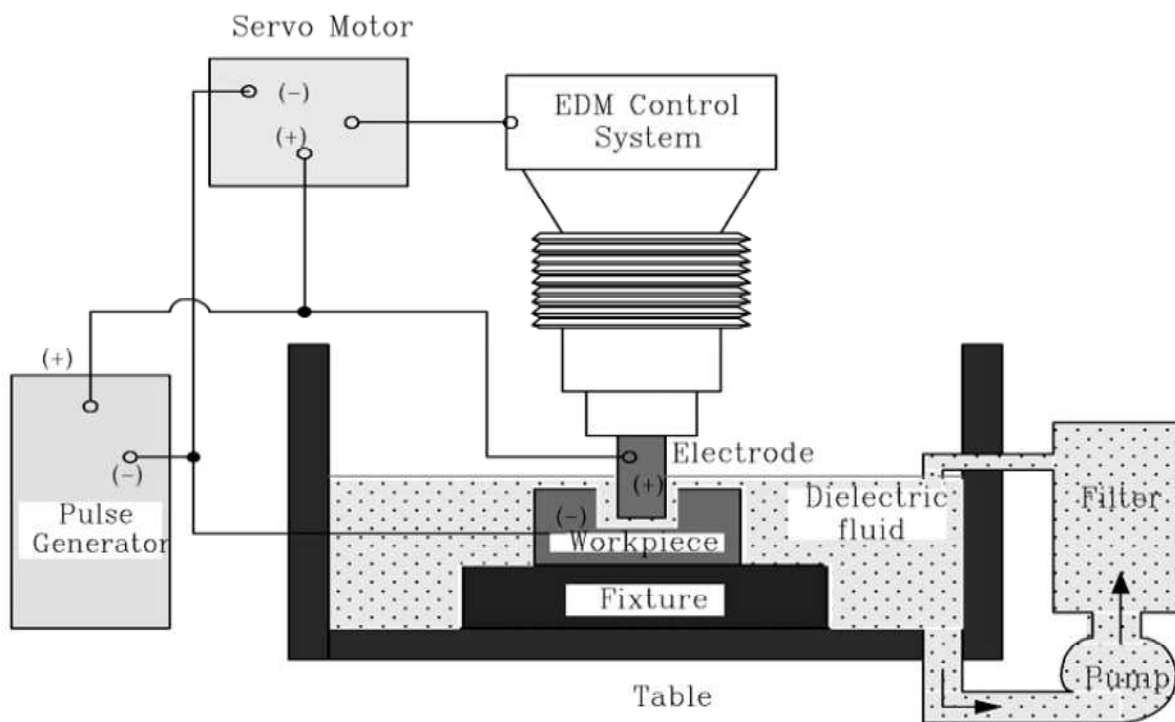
Schematic of an Electric Discharge machining (EDM) machine tool
